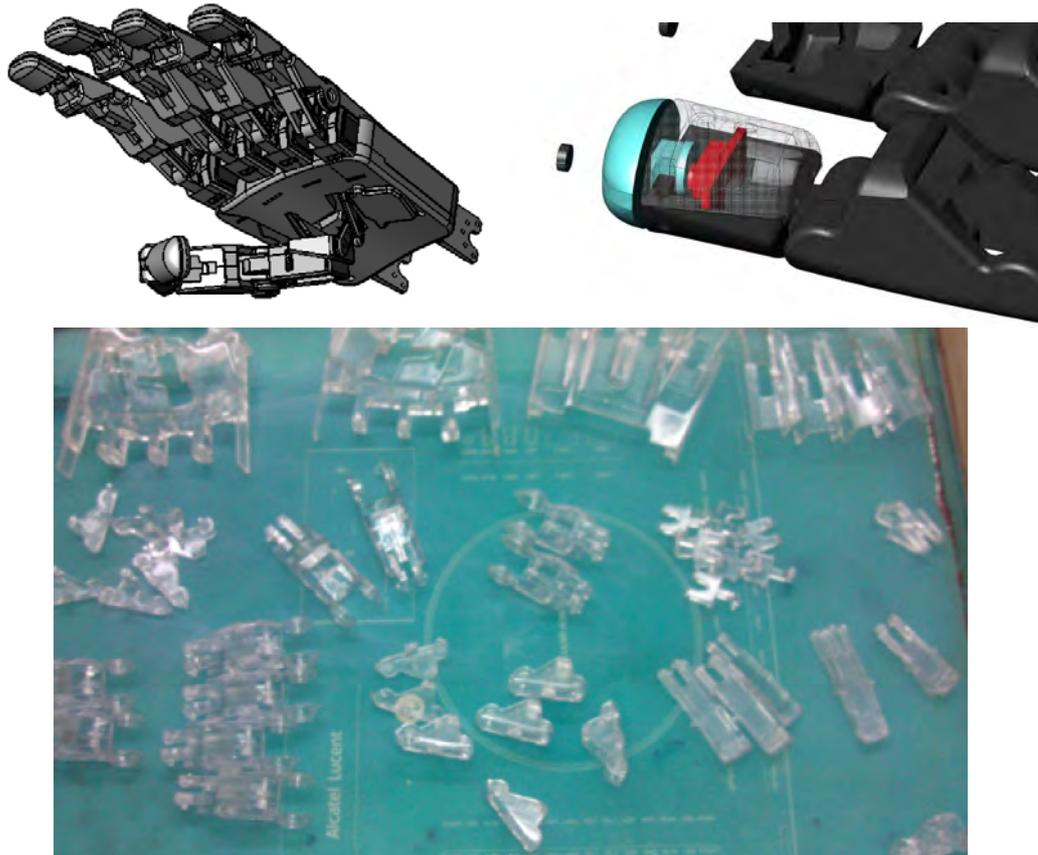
CAD model of the hand, fingertip sensor and CNC parts (Demers 2012)
